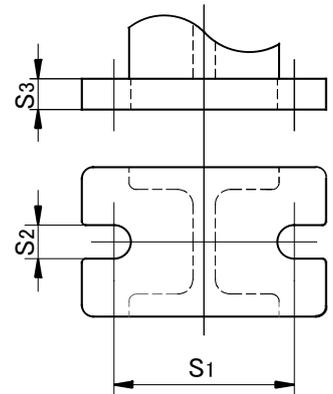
Bottom stand fixing (Nominal size 15~50mm)
